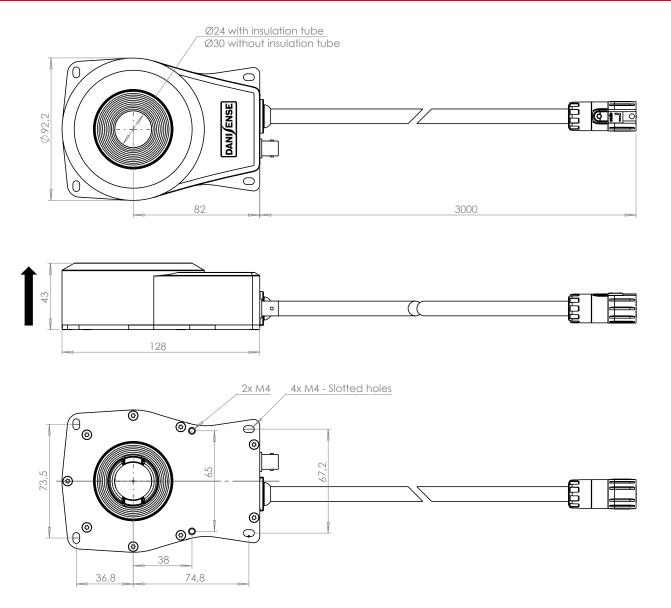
Dimensions of sensor head. Tolerance is 0.3 mm
